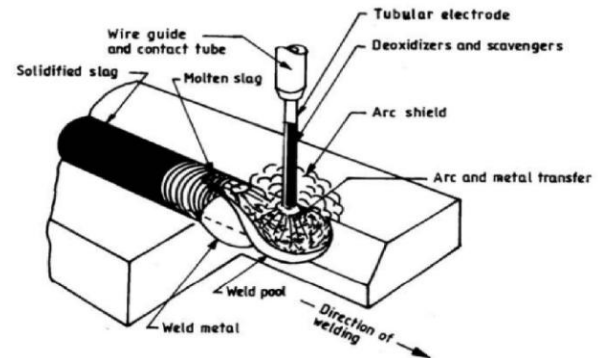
Schematic of Flux Cored Arc Welding
